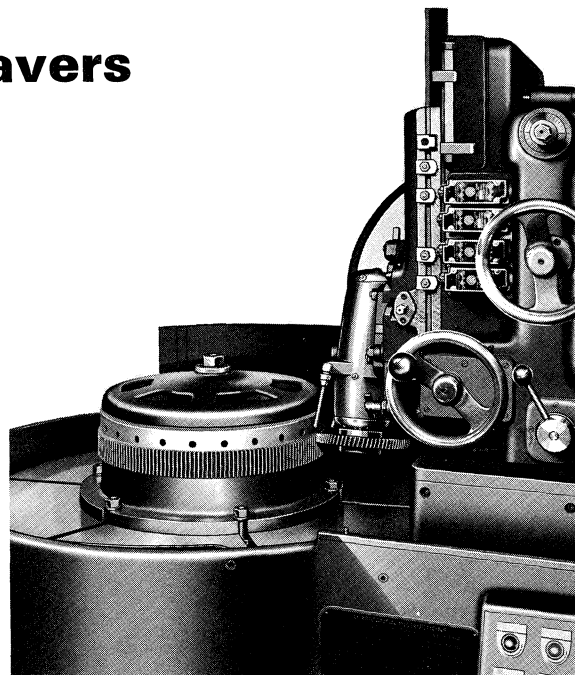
Shaving an external gear on the Model GCQ machine.
